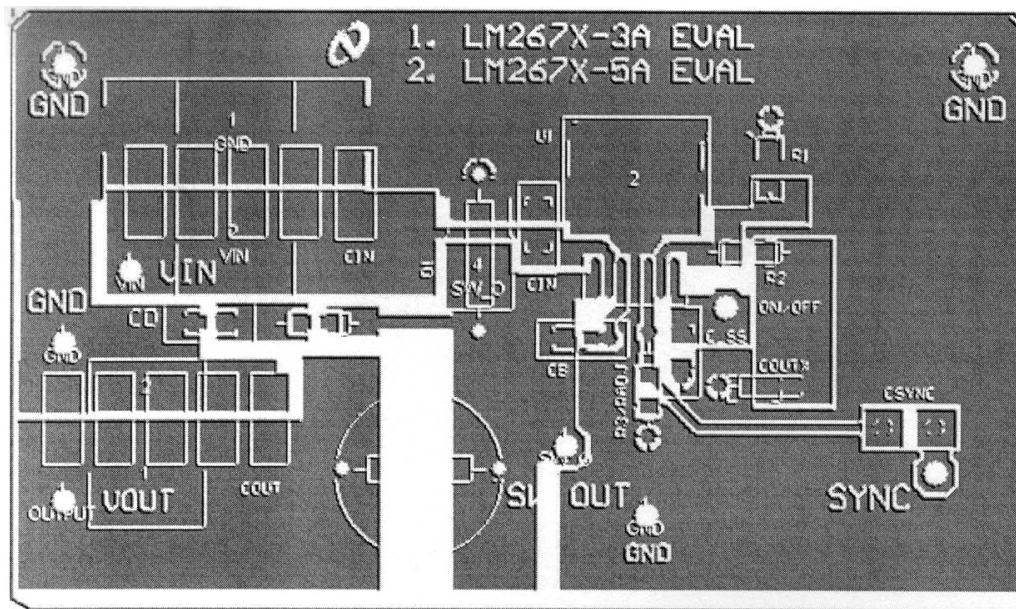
Top Layer Foil Pattern of Printed-Circuit Board
